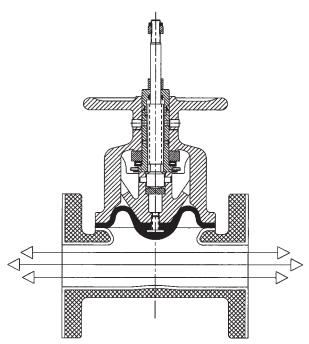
Straight-through diaphragm valve. (Courtesy of ITT Engineered Valves)
